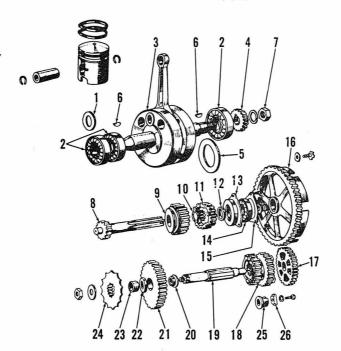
Exploded view of crankshaft and transmission for 7D and 7S models, HM/S is similar except clutch is located on crankshaft.
